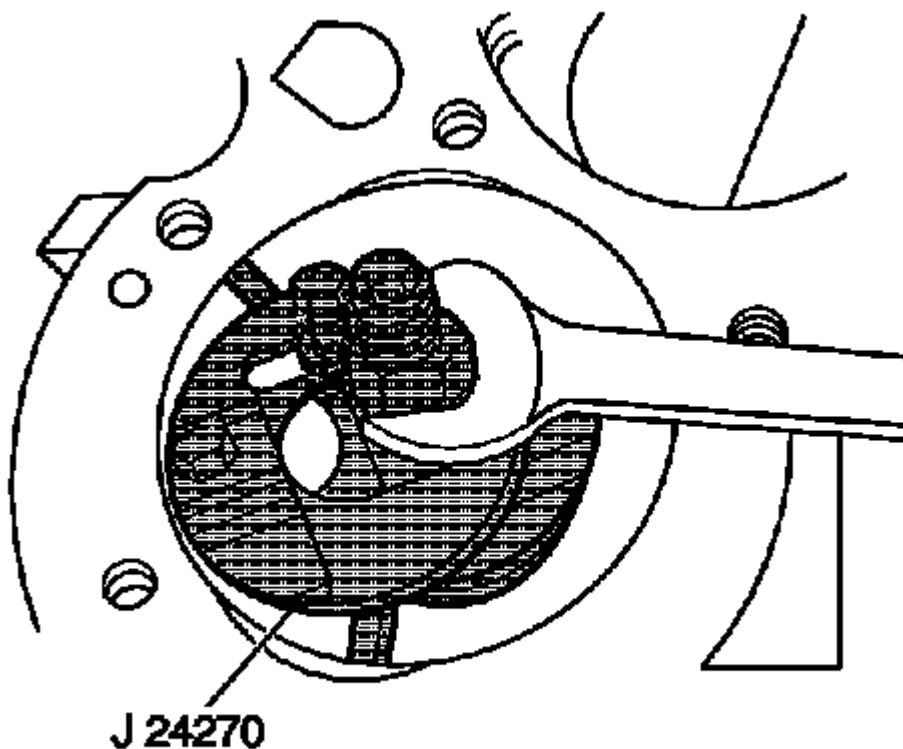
View Of Removal Of Cylinder Bore Ring Ridge
